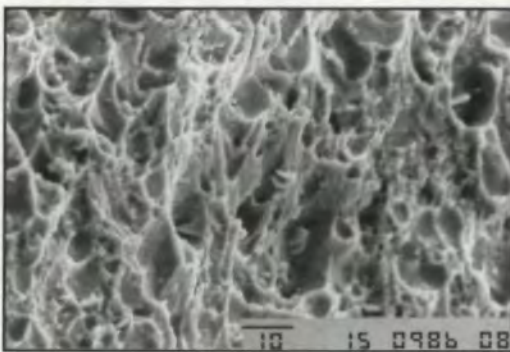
Electron micrograph of sheared aluminum interlayer from torsion specimen fracture surface. (1000X)
